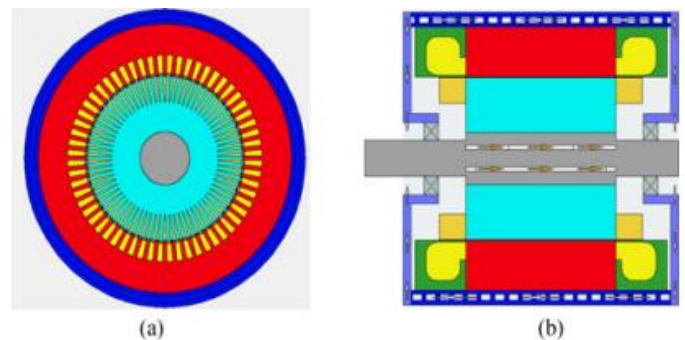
Induction motor design for BEV. (a) Radial view. (B) Axial view [34]
